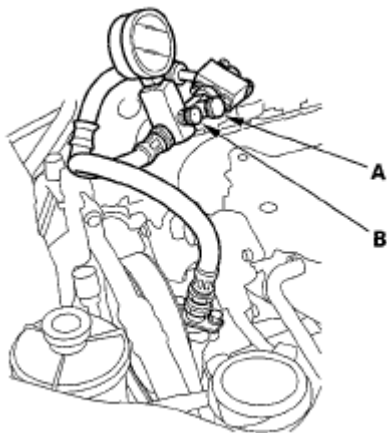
Identifying Shut-Off Valve And Pressure Control Valve
